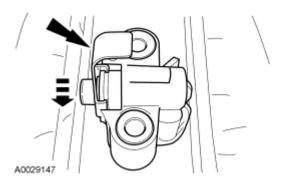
Compressing Tensioner Plunger Courtesy of FORD MOTOR CO.
